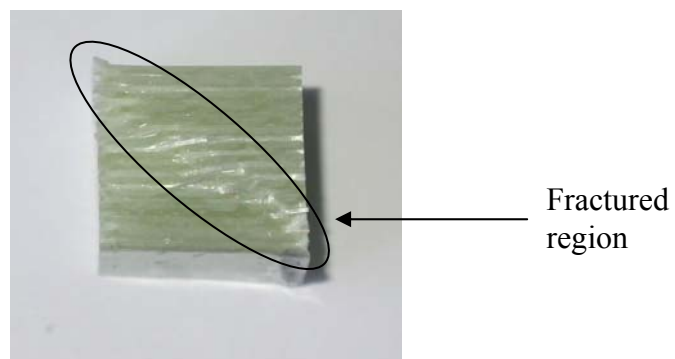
Failure direction of the ply-lay up specimen loaded in compression test
